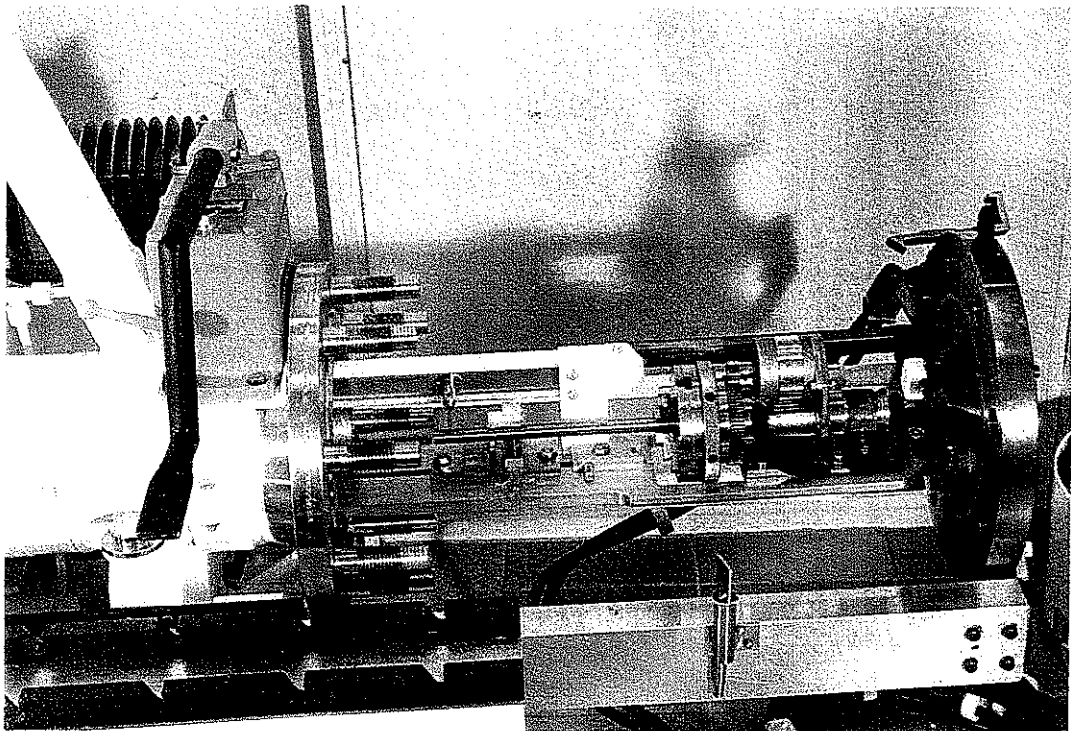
The Welding and Drying Unit, showing the chuck, the rod supports and the TIG electrode
